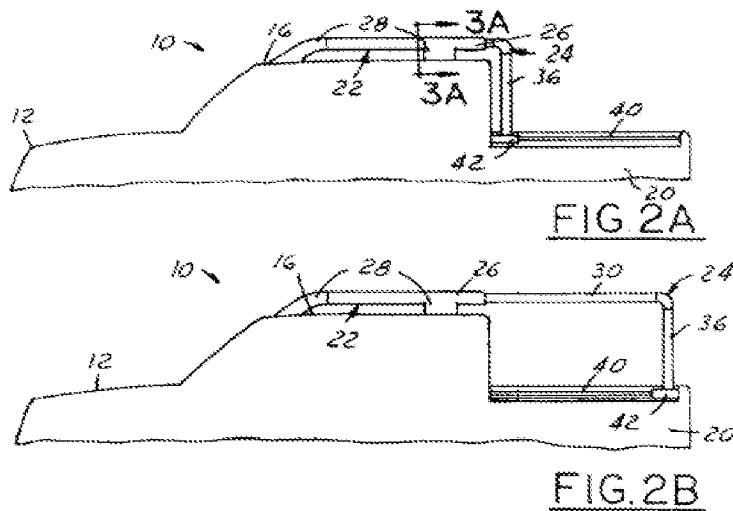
A shows the rack assembly claimed in the retracted position and Figure 2B shows the rack assembly in the extended position.
